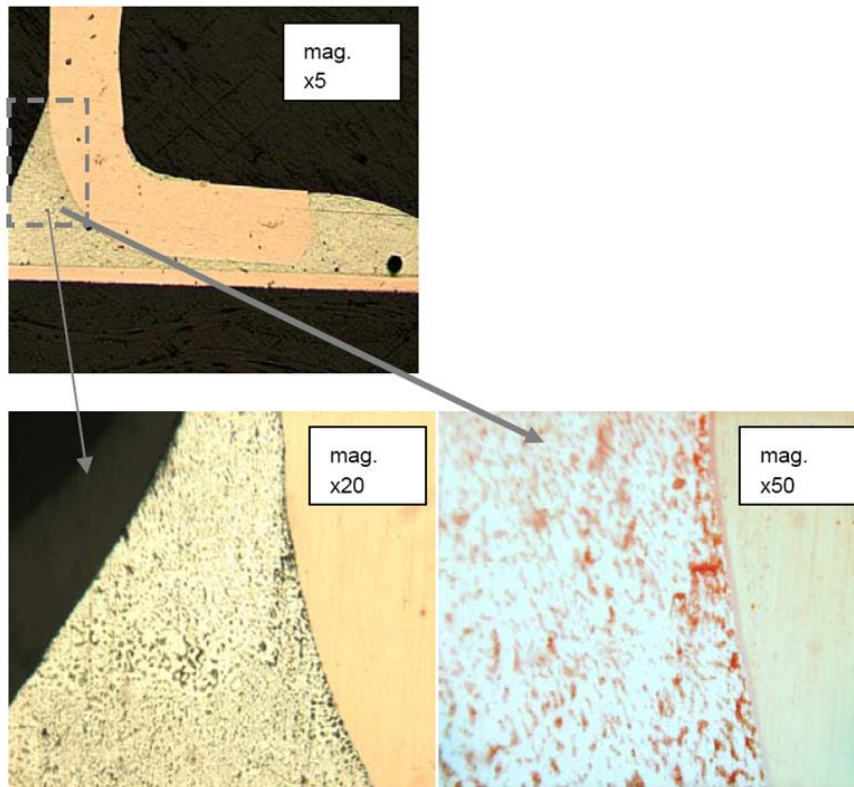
Cross-section of the DIL package lead's solder joint (with eutectic SnPb solder).
